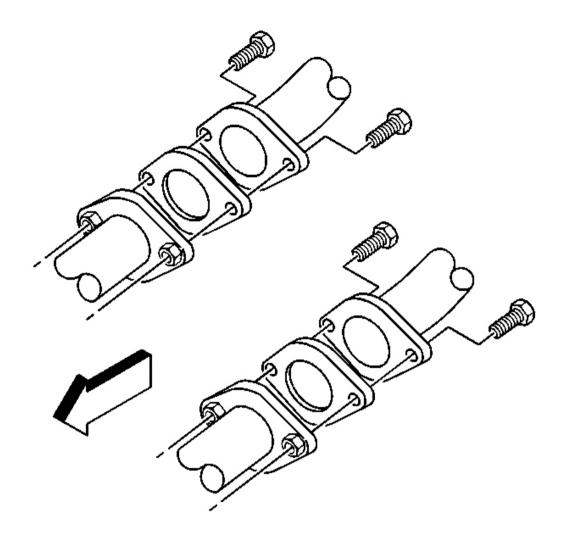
Exhaust Muffler, Bolts & Gaskets Courtesy of GENERAL MOTORS CORP.
